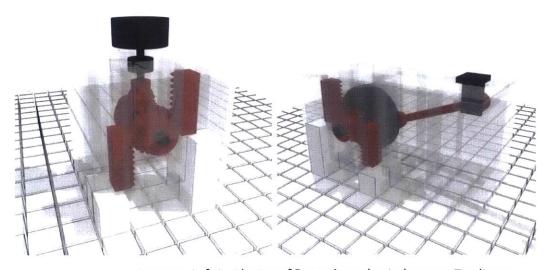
Left: Inside view of *Rotator's* mechanical system. Two linear gears are driven by the pins which translates into rotation using a gear train. Right: Gears and a lever create horizontal movement in the *Slider* block.
